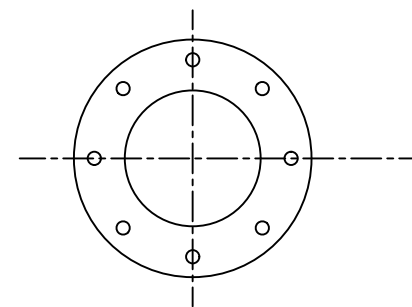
DETAIL - FLANGE ADAPTER AND BACK-UP RING
